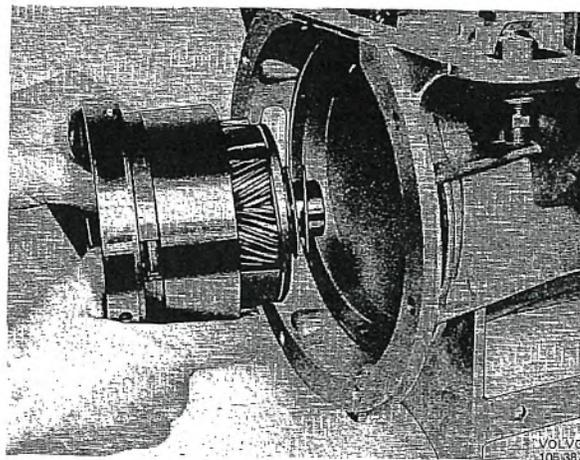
Installing center support and planet gears with needle thrust bearing and plate washer
